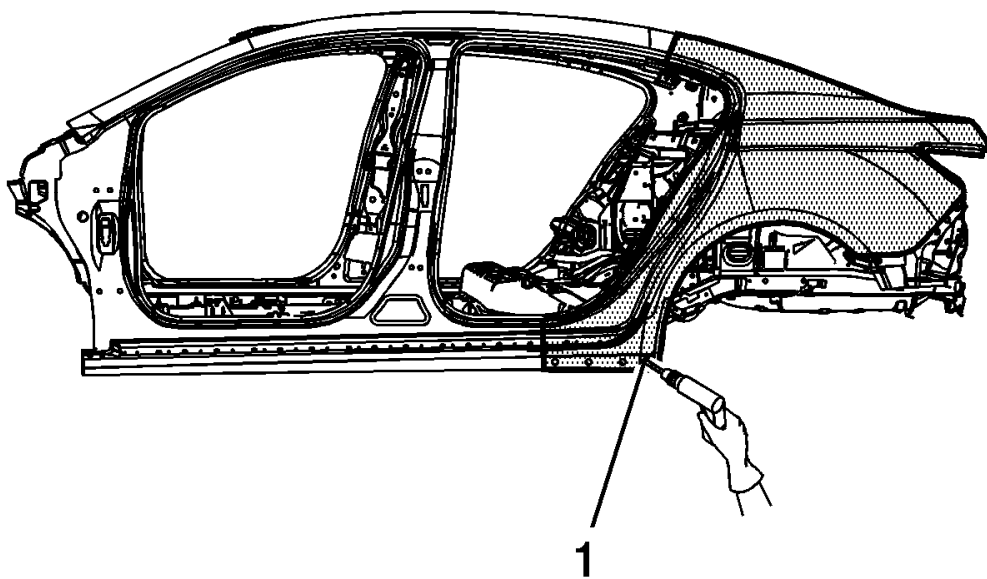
Drilling Out Quarter Outer Panel Factory Welds
